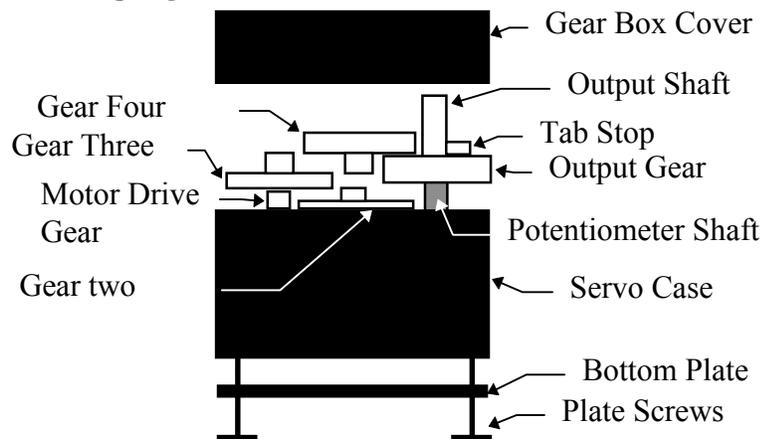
Servo hack: Remove tab stop, remove potentiometer tab inside *Output Gear*, set potentiometer shaft at center setting.
